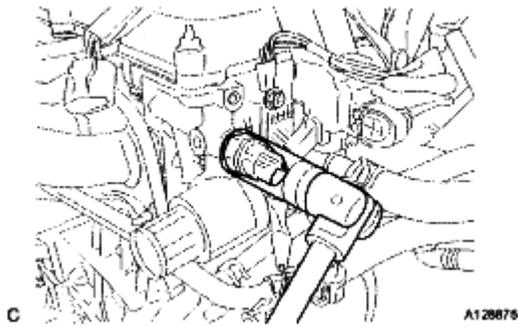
Installing Engine Oil Pressure Switch Assembly
